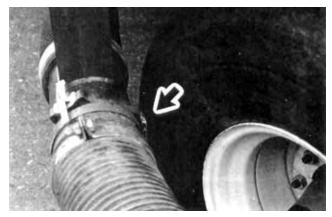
Interference Between Primary Hose and Front Castor Wheels.
